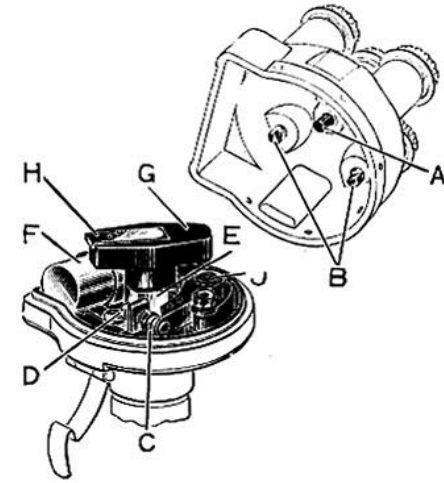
DISTRIBUTOR AND CONTACT BREAKER TYPE DJ4.
